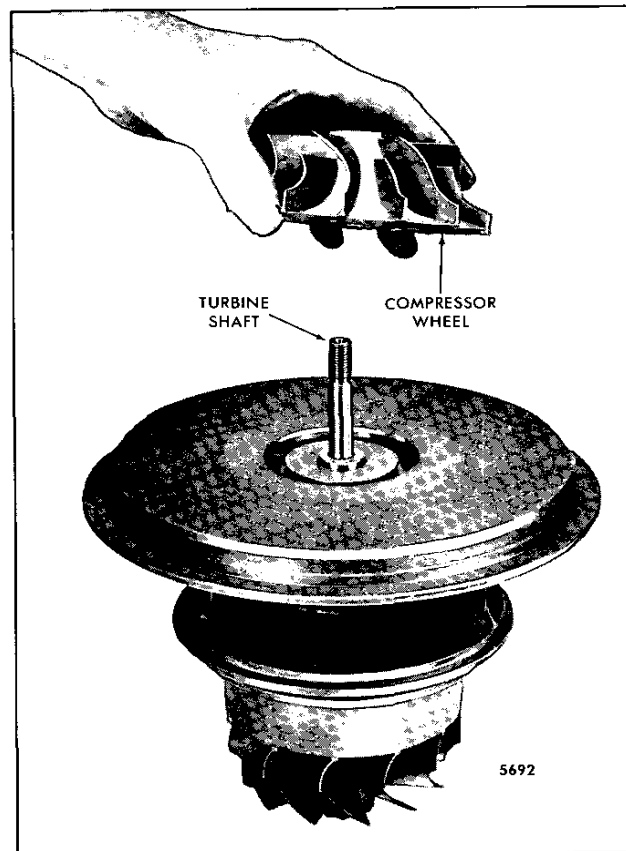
Removing Compressor Wheel from Turbine Shaft
